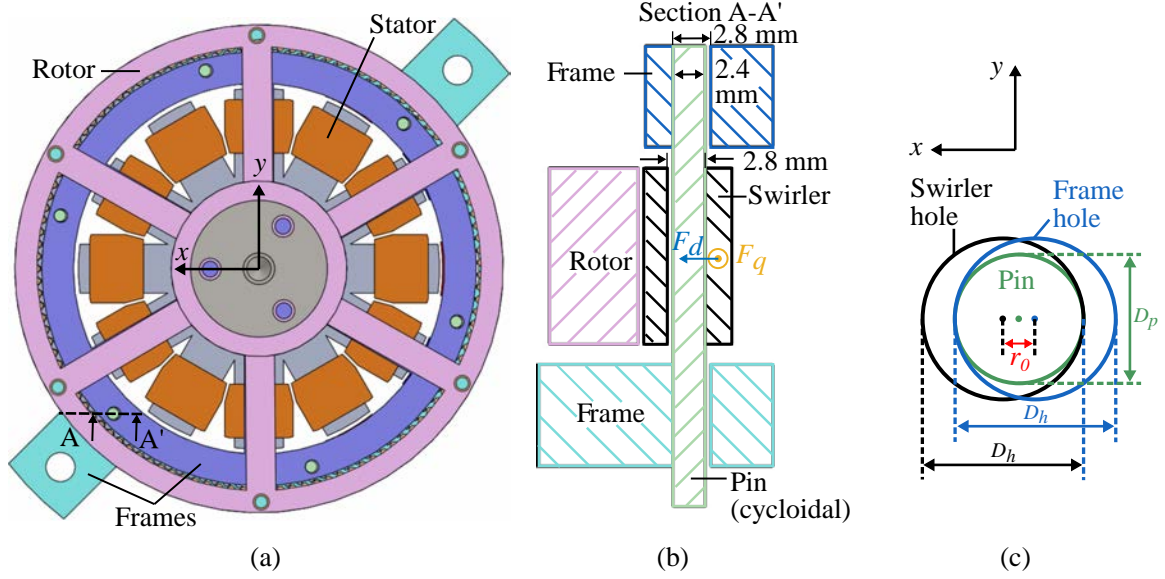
(a) Bottom view of the prototype; (b) cross-sectional views of A-A'; (c) pin configuration.
